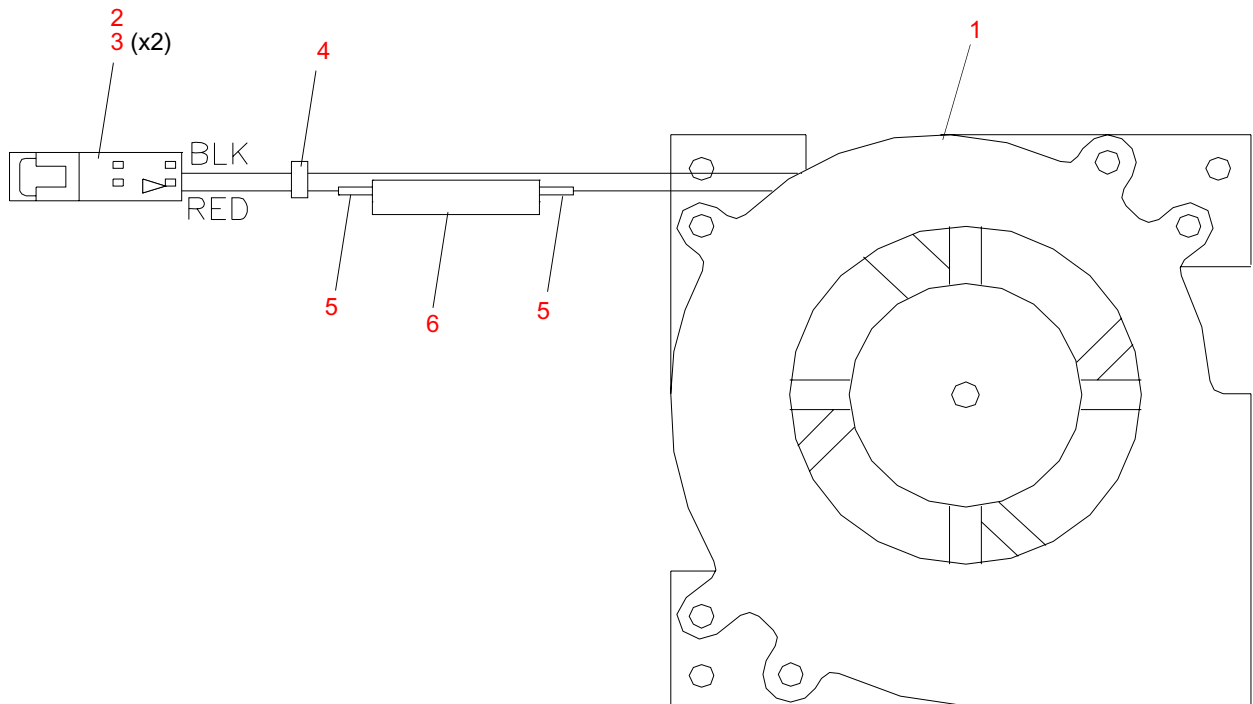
Head Front Fan Assembly - VL3000Q Only
